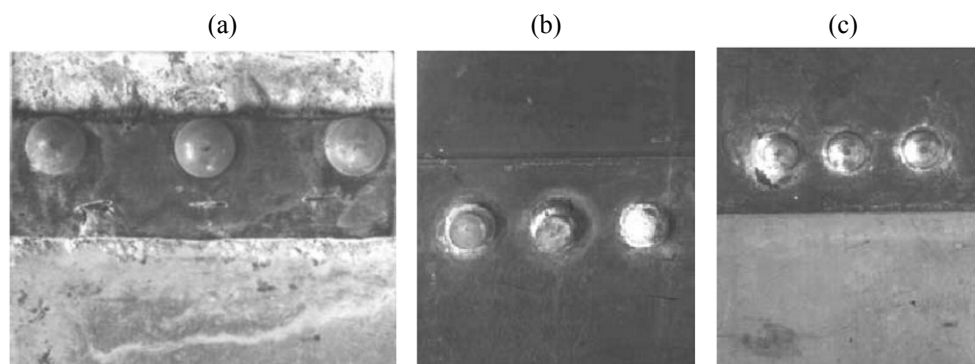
Samples after corrosion tests in a tropical climate chamber: (a) D16AT (CAOC), KMU-3l, VT-30 welded joints; (b) KMU-3l, KMU-4l, V65 welded joints (CAOC); and (c) KMU-3l, OT4, V65 welded joints (CAOC). Test time 6 months.
